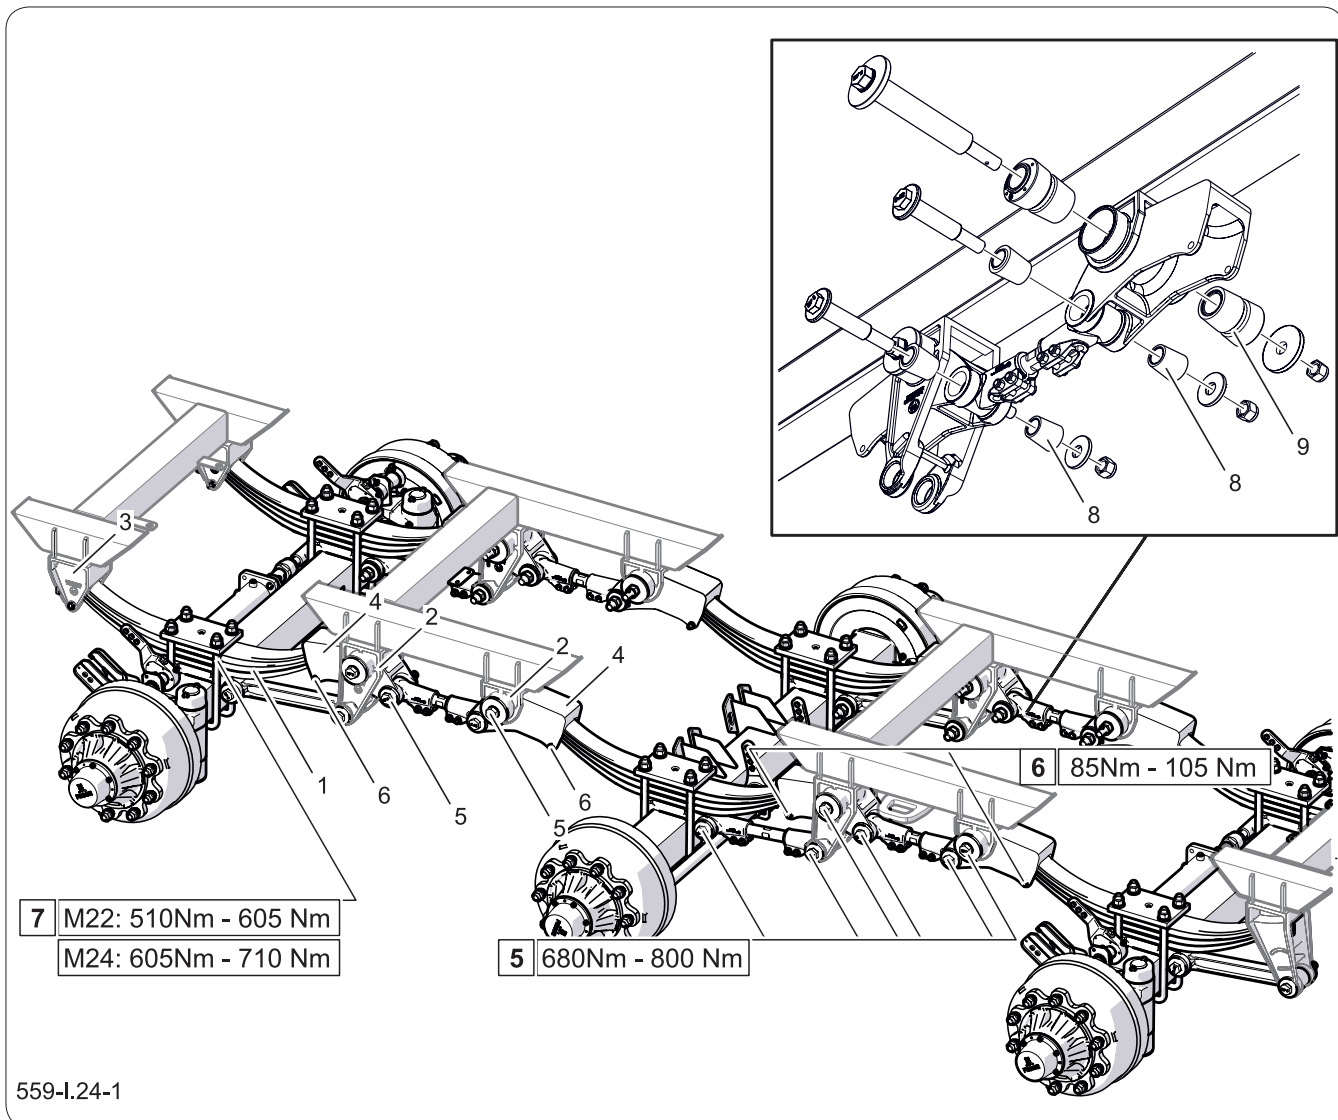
Support for Tridem mechanical suspension, axle mounted under suspension spring
